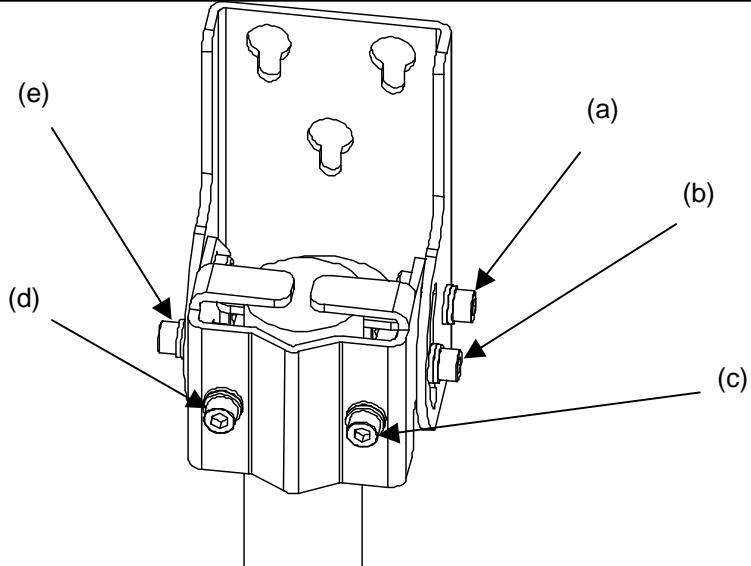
Installing the AP-RFU Mounting Bracket on the Pole
